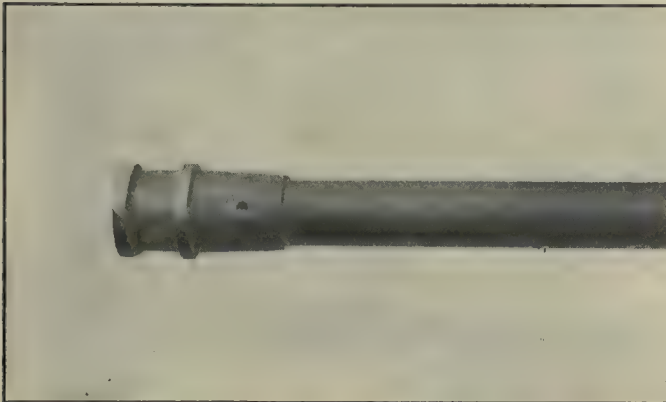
STEERING COLUMN BEFORE WELDING
